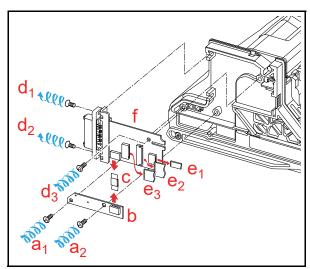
Home Position Sensor Board, Home Position Sensor FFC Assembly and Interface Connector Board Removals
